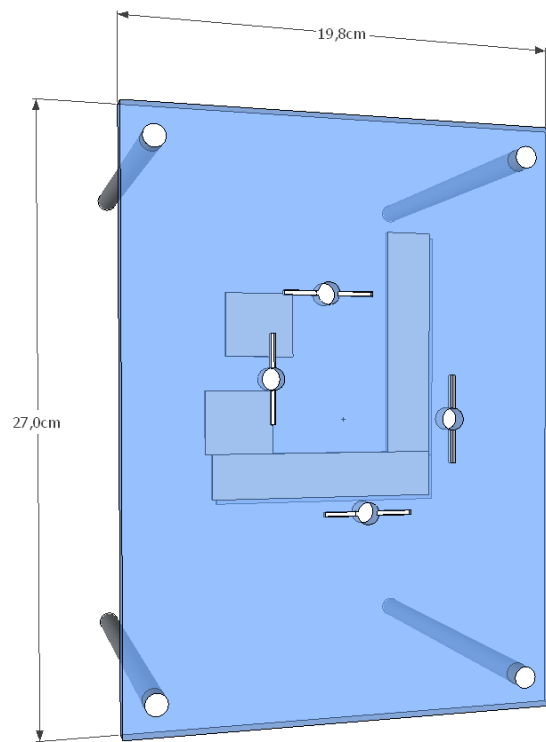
The back of the bottom plate revealing the rubber band holes
